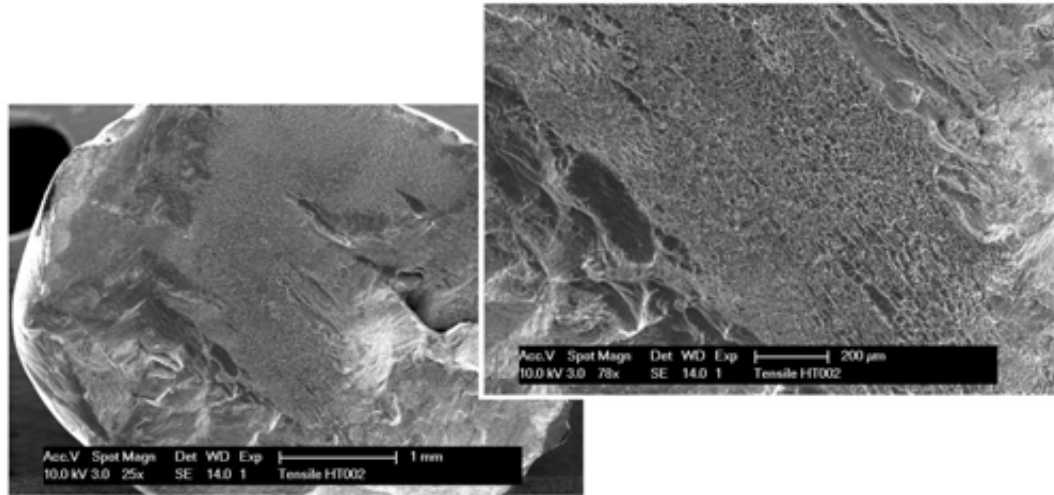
Ti6246 tensile specimen HT002 fracture surface
